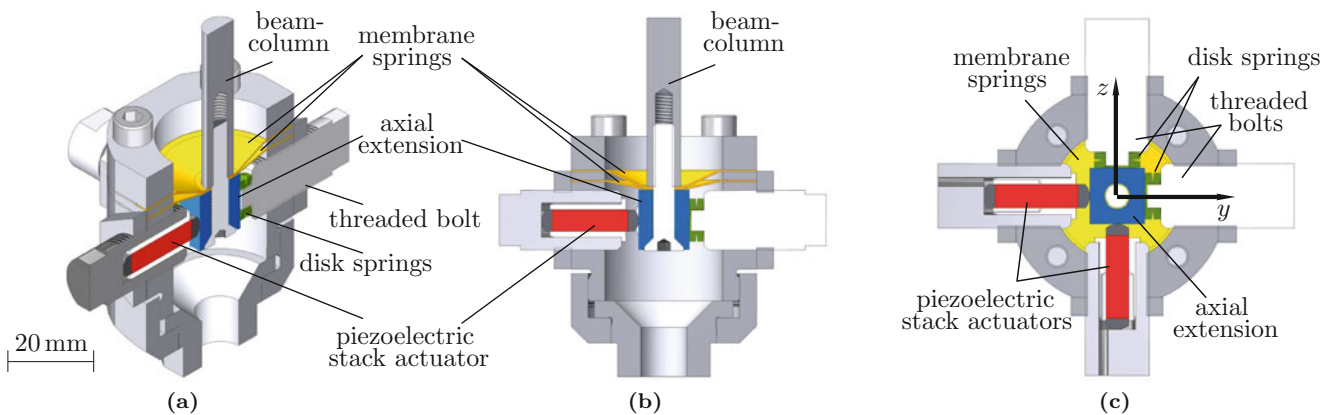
Sectional views of piezo-elastic support A, (a) 3D section through x - y -plane, (b) 2D section through x - y -plane, (c) 2D section bottom view through actuator-plane
